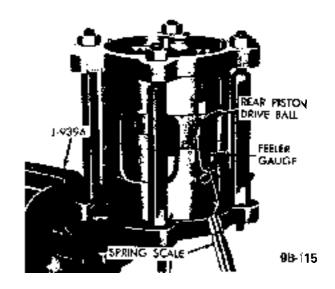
B-142 Checking Clearance Between Rear Piston Drive Ball and Swash Plate
